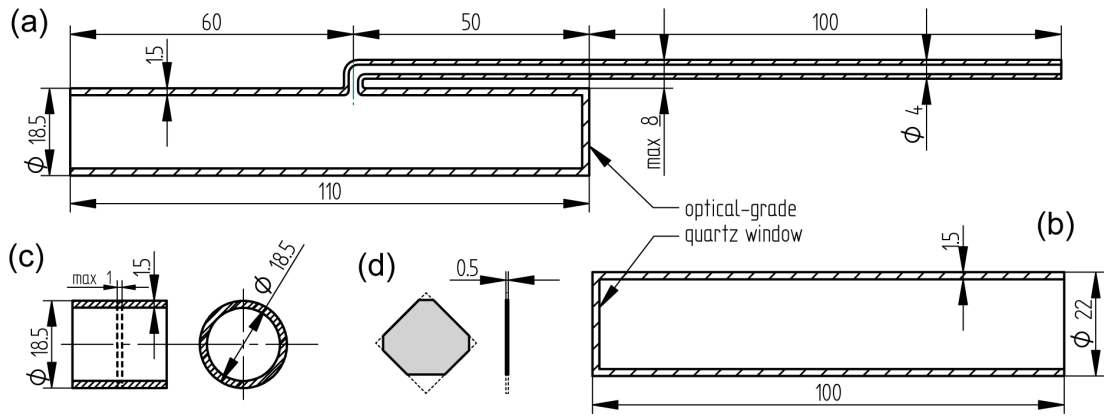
Drawings of particular parts of the quartz ampoule: (a) inner ampoule, (b) outer ampoule, (c) sample holder, (d) front and side views of the shape of a sample.
